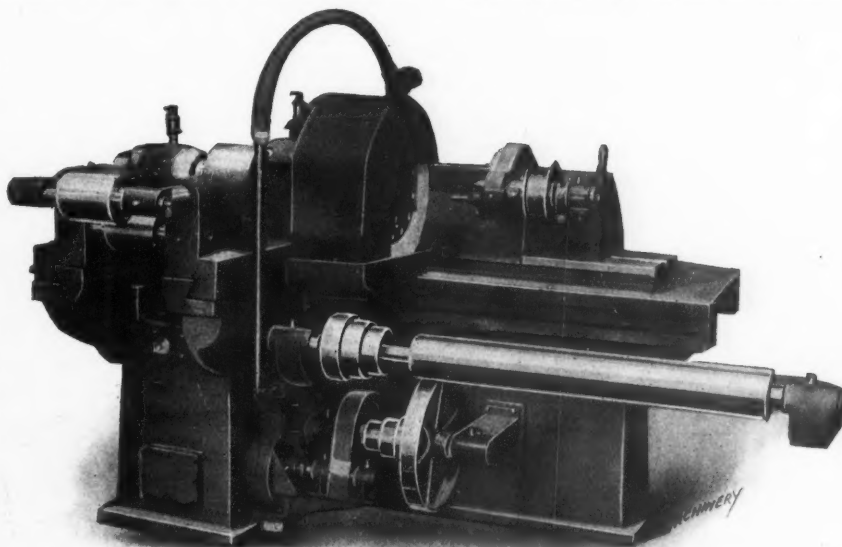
Rear View of Machine shown in Fig. 1, equipped for Belt Drive
